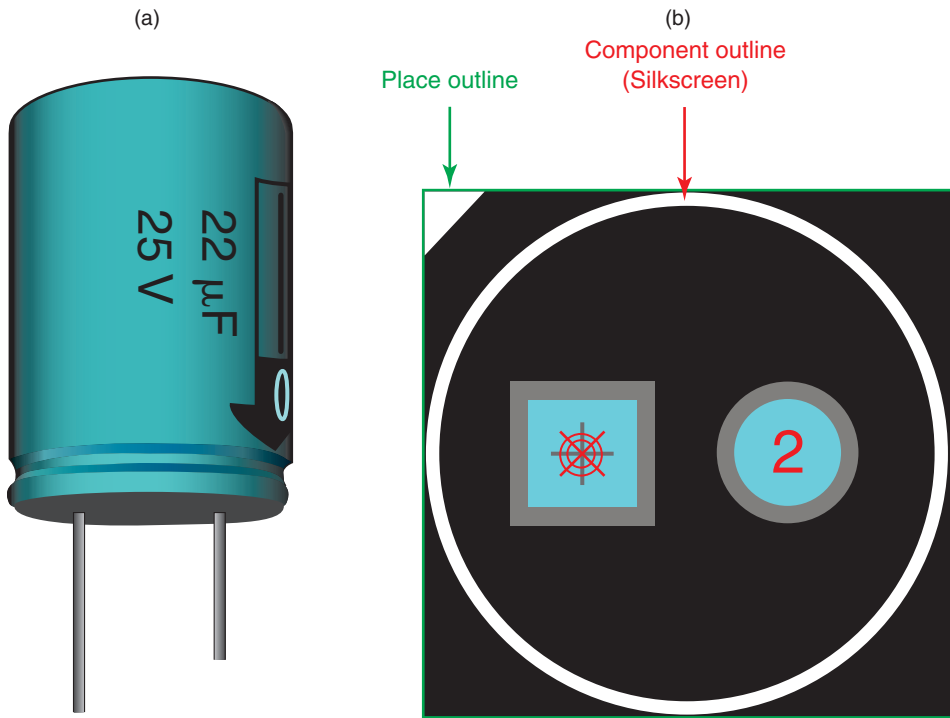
Radial-leaded through-hole device. (a) Axial-leaded capacitor. (b) Layout axial footprint
